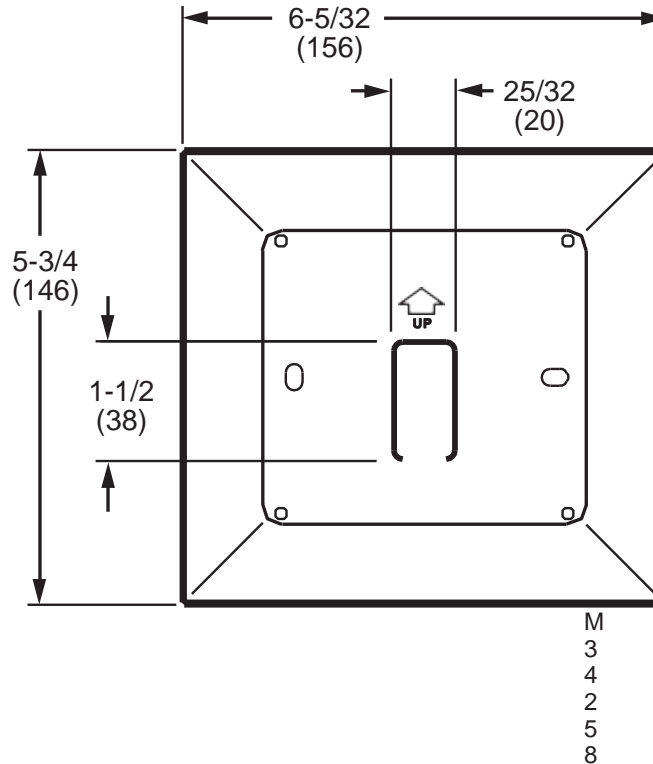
Dimensions of VisionPRO cover plate in in. (mm).
